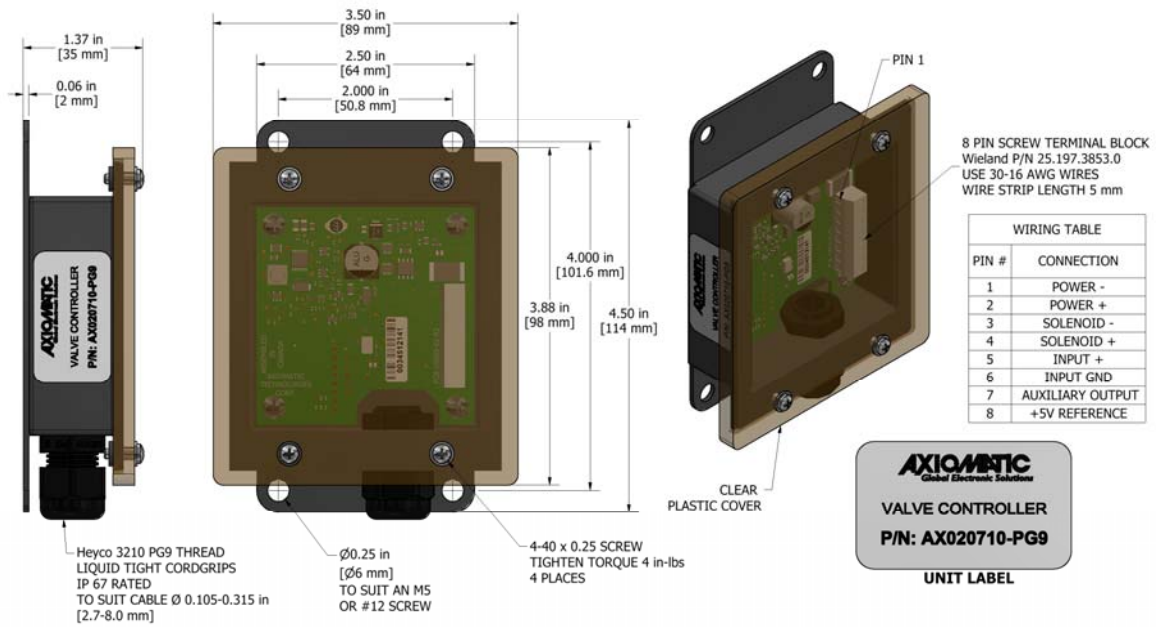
Dimensional Drawing of AX020710-PG9
